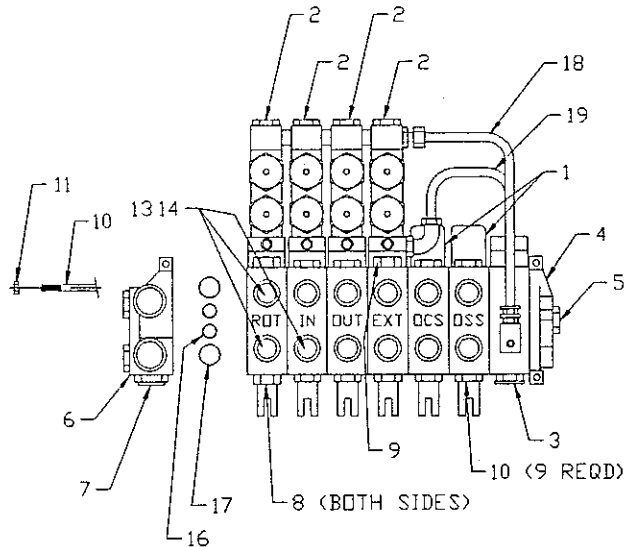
VALVEBANK - 4 REMOTE/2 MANUAL (51705094)
